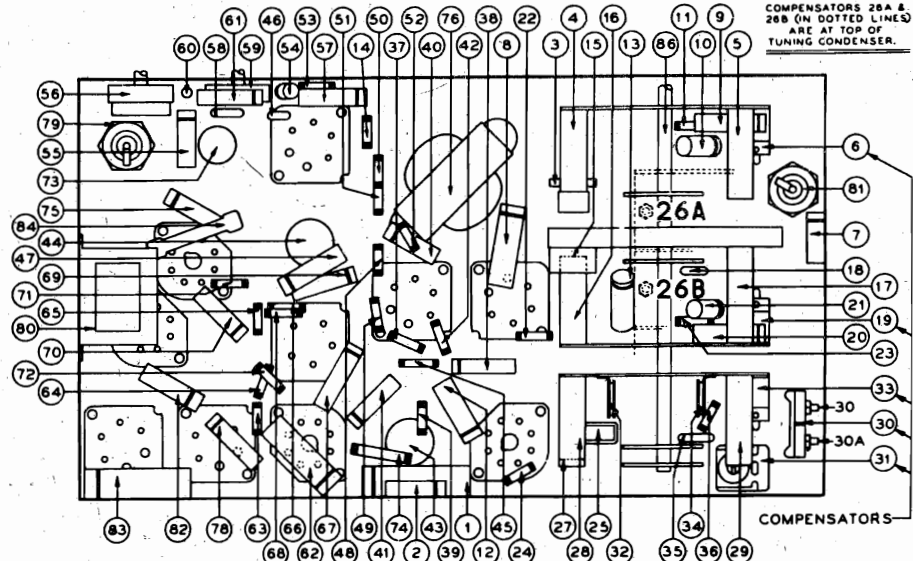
Part Locations, Model 39-751, Underside of Chassis
